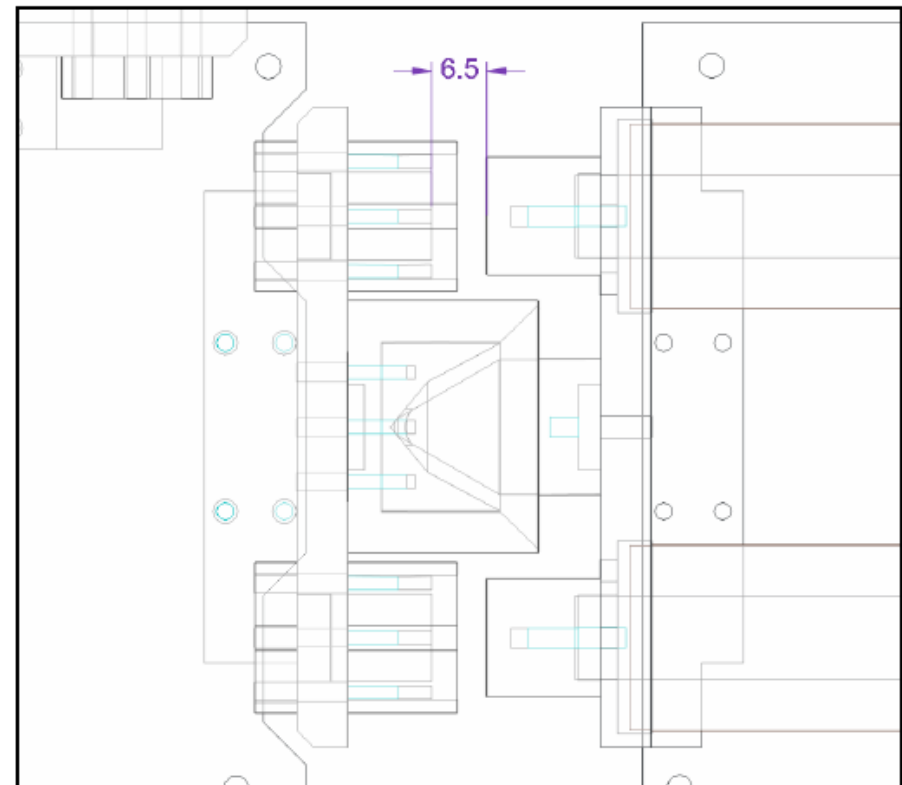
EMDS PMDS single probe docked position (dimensions in mm)
